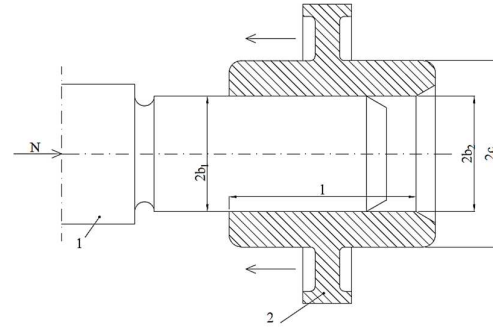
Assembling a manual wheel on a shaft: 1 - shaft; 2 - wheel for manual operation
